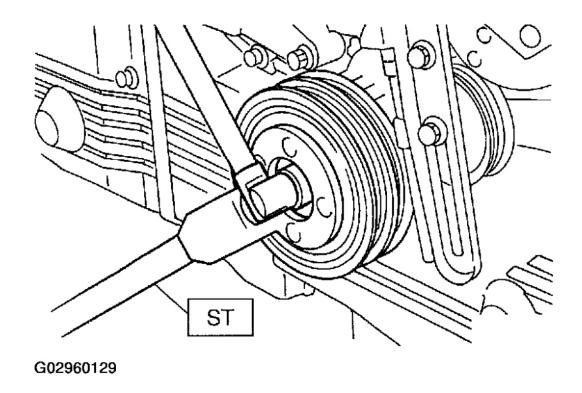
Tightening Crankshaft Pulley Bolt Courtesy of SUBARU OF AMERICA, INC.
